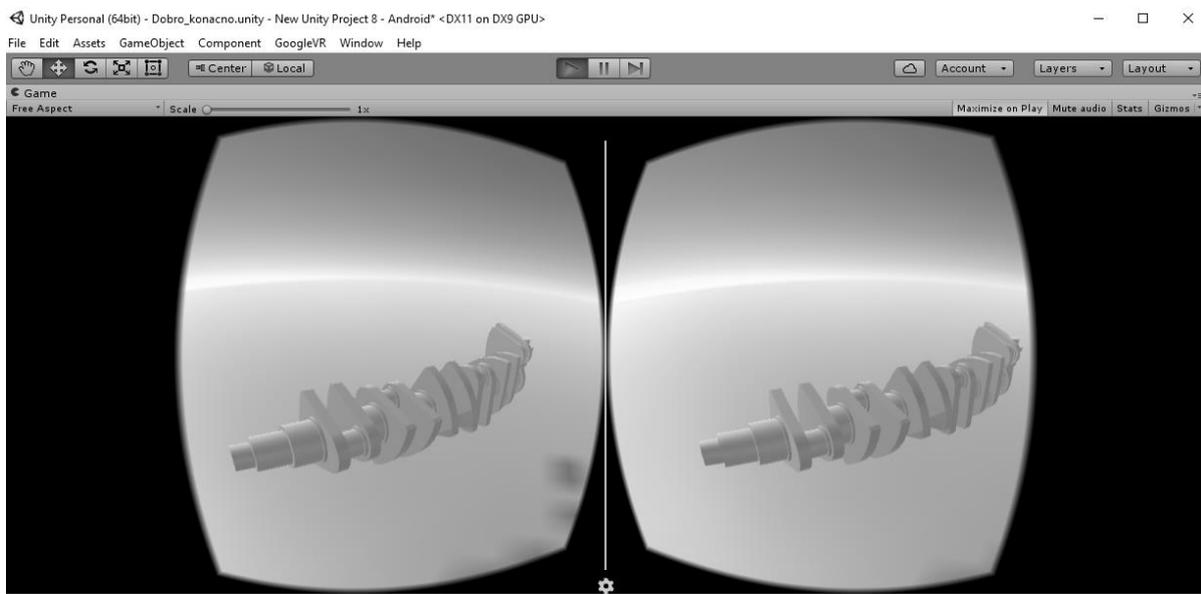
Crankshaft displayed in Unity3D (Cardboard view).
